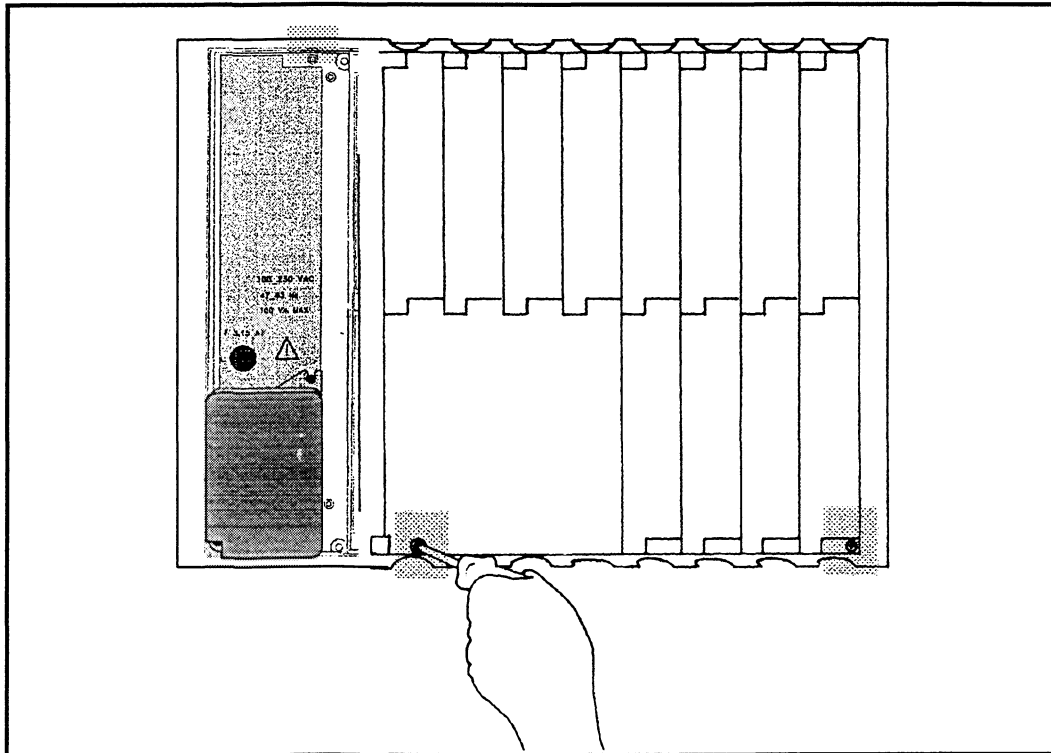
Removing the electronic chassis fixing screws at the rear
